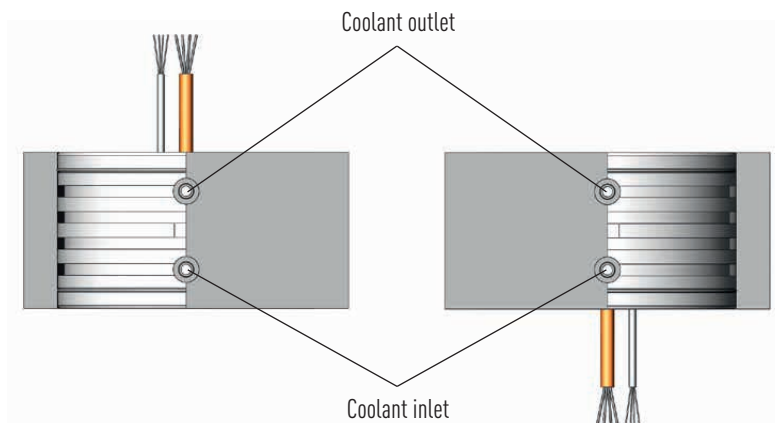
Coolant inlet and outlet in horizontal mounting position
